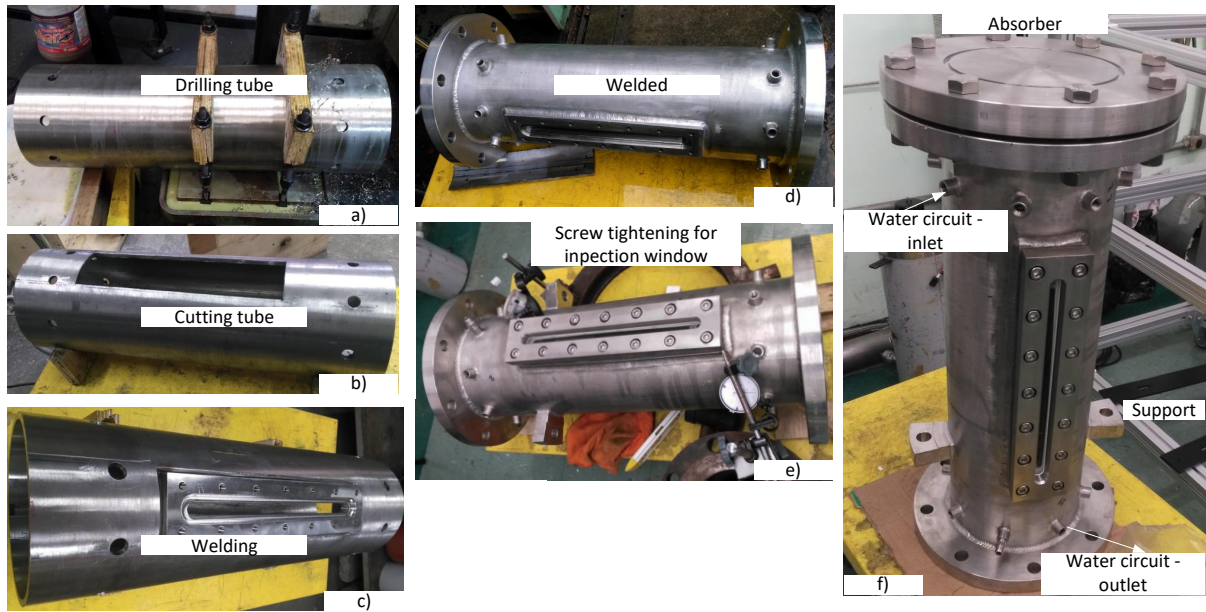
Absorber for ammonia-water absorption a) drilling tube, b) cutting tube, c) welding tube, d) welded tube, e) inspection window and f) final absorber
